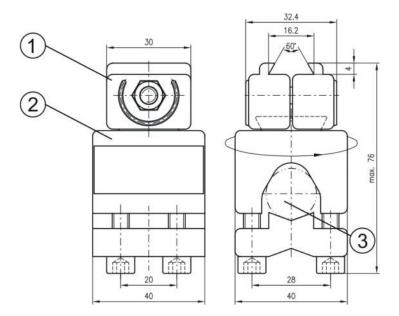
Dimension drawing BE 901 FA-002 mounting device (all dimensions in mm)
